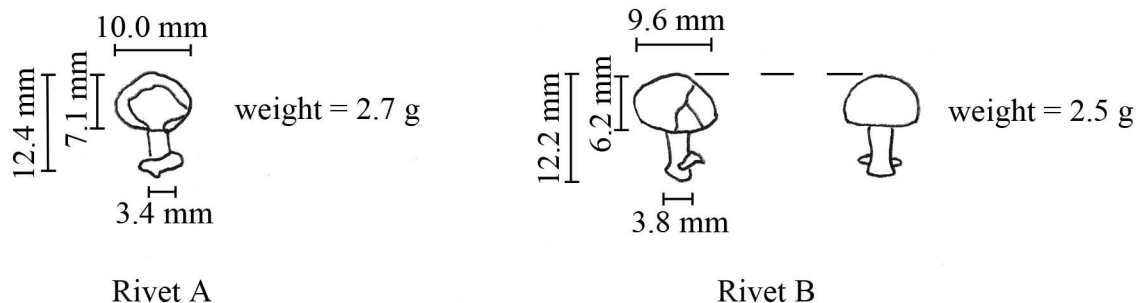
iii: Rivets (MIT 5343). Drawing and measurements.
